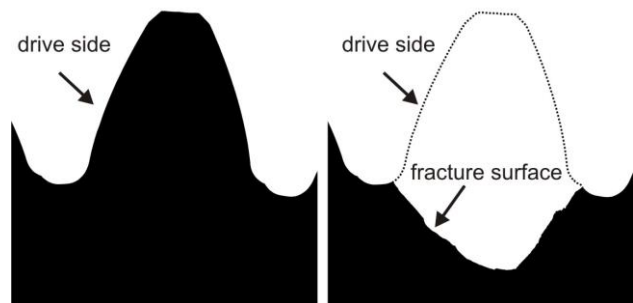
Typical fracture surface ($a = 0 \text{ mm}$)
